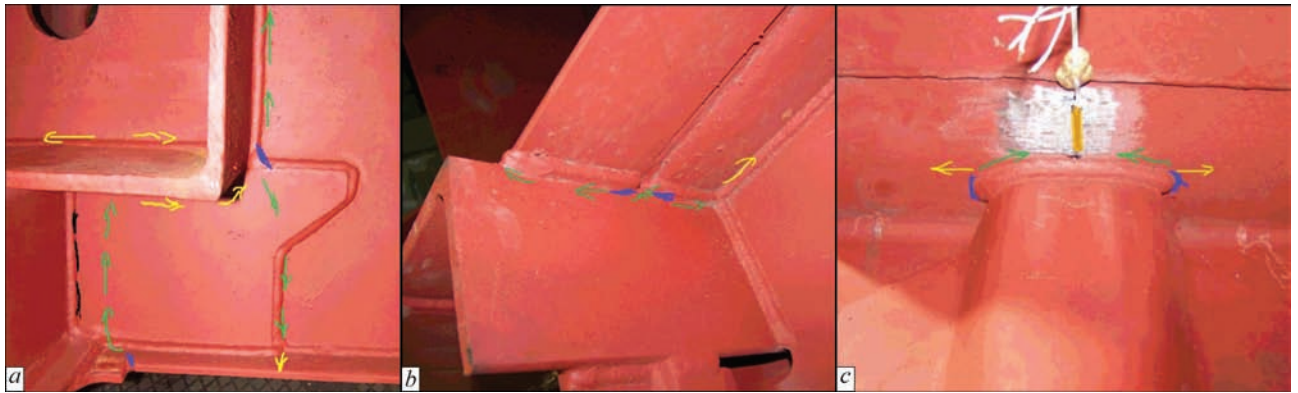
Crack propagation: a — in bolster assembly; b, c — in side wall rack sealing assembly
